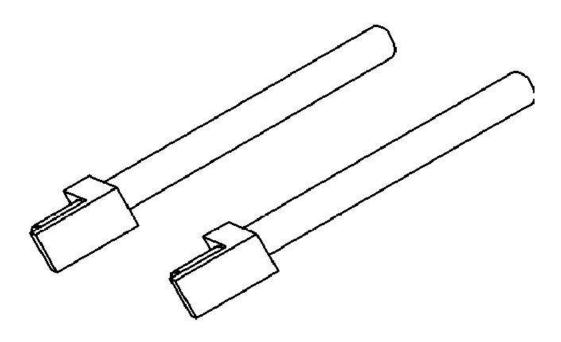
Connecting Rod Installation Guides 8189 Courtesy of CHRYSLER LLC
